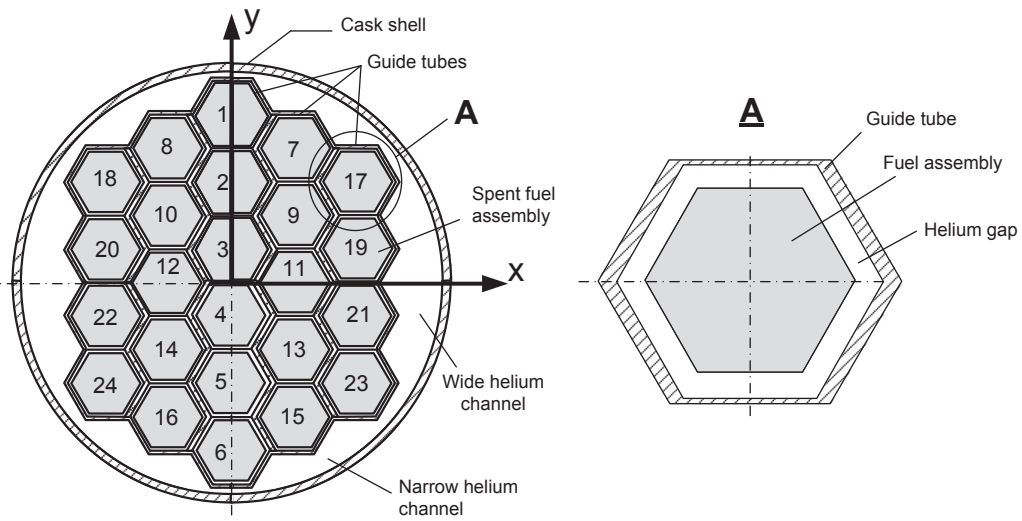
Structure of storage cask (horizontal section). A, part view of spent fuel assembly inside guide tube.
